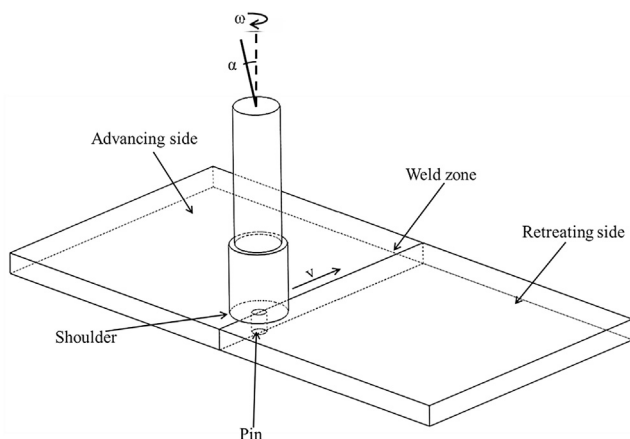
Schematic view of friction stir butt welding process.
